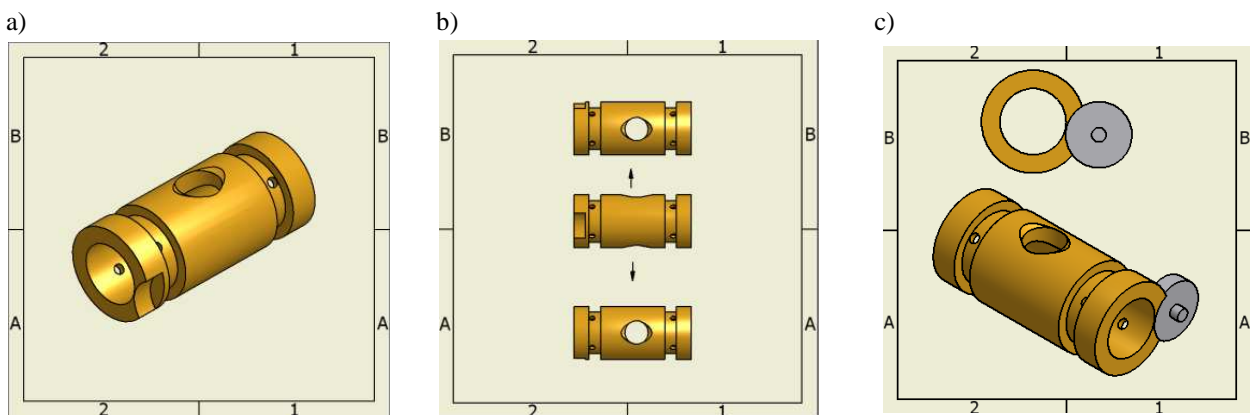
Radial slide bearing bushing: a) general view, b) top and bottom hole trailing oil, c) method to determine position relative to the body bearings acetabular
